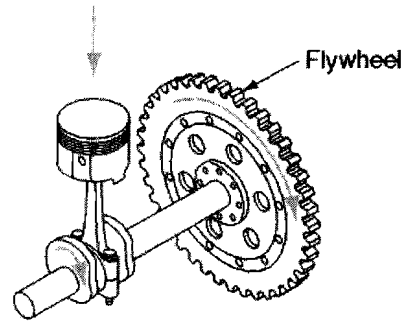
The flywheel provides weight or inertia to keep the crankshaft turning
